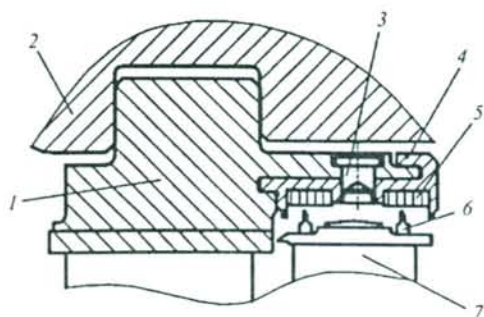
Configuration of honeycomb shroud seals used in diaphragm baffle plates: 1, diaphragm; 2, yoke; 3, dowel; 4, honeycomb insert; 5, honeycomb unit; 6, rotor lug; 7, working blade.
